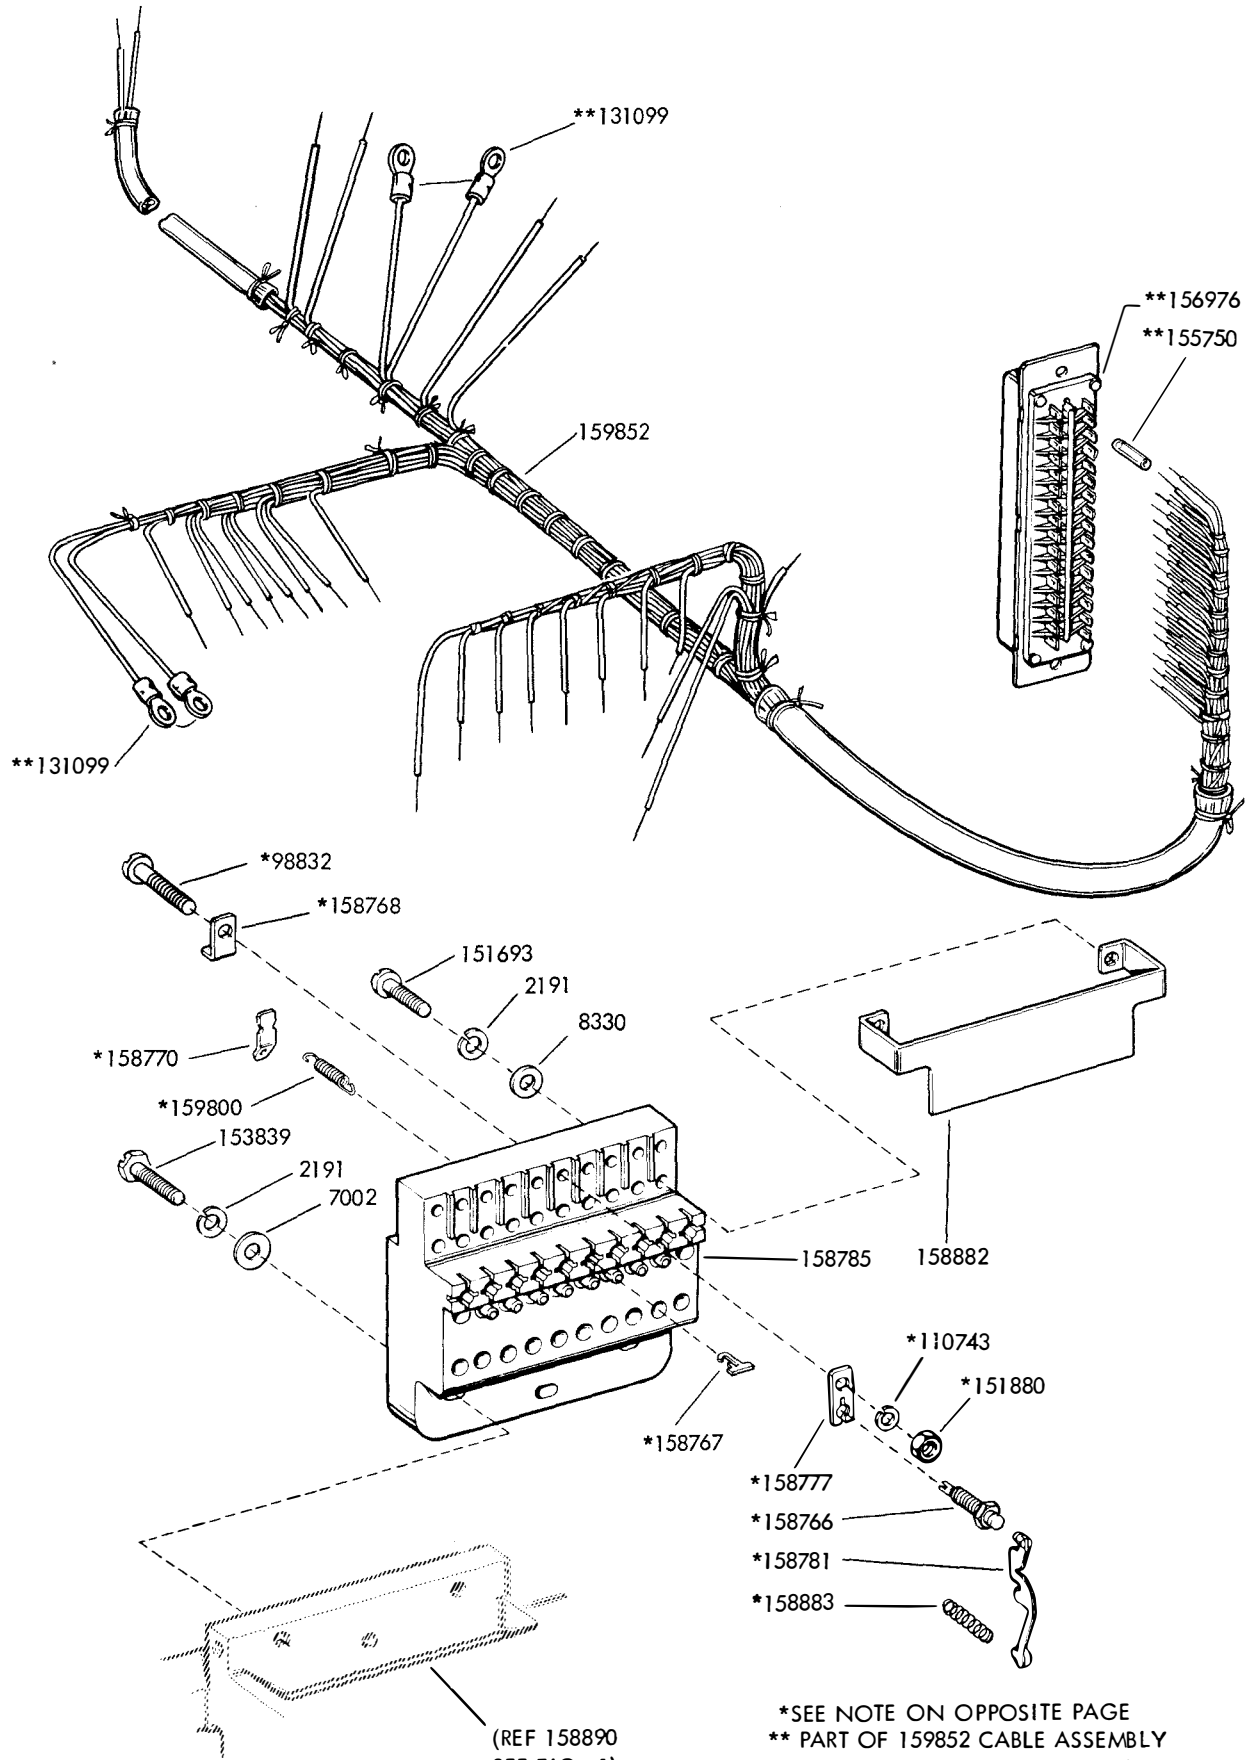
DISTRIBUTOR CONTACT BLOCK
